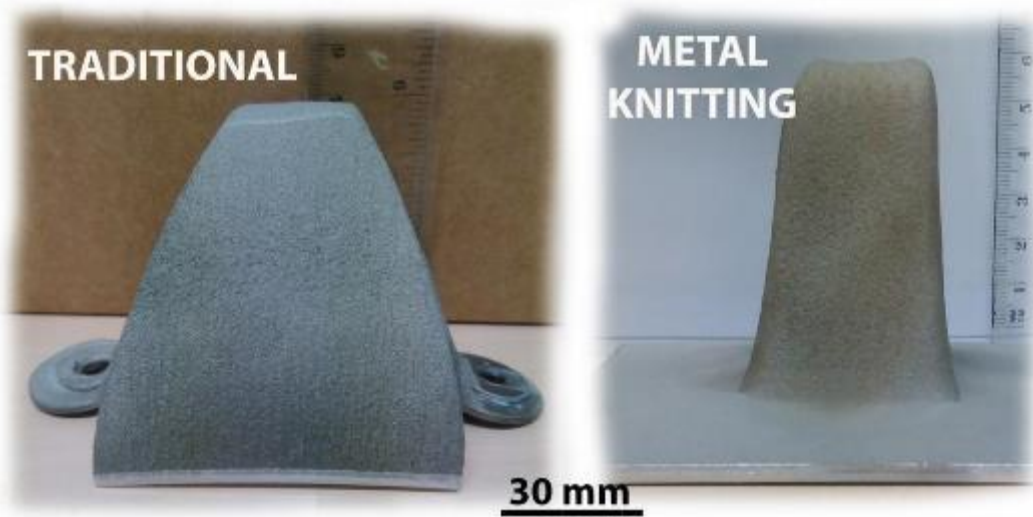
CSAM traditional and Metal Knitting 316L samples as-sprayed for tensile testing.
